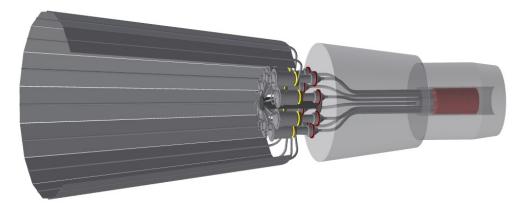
Fixed Heat Pipe Radiator Type 1 [2].
